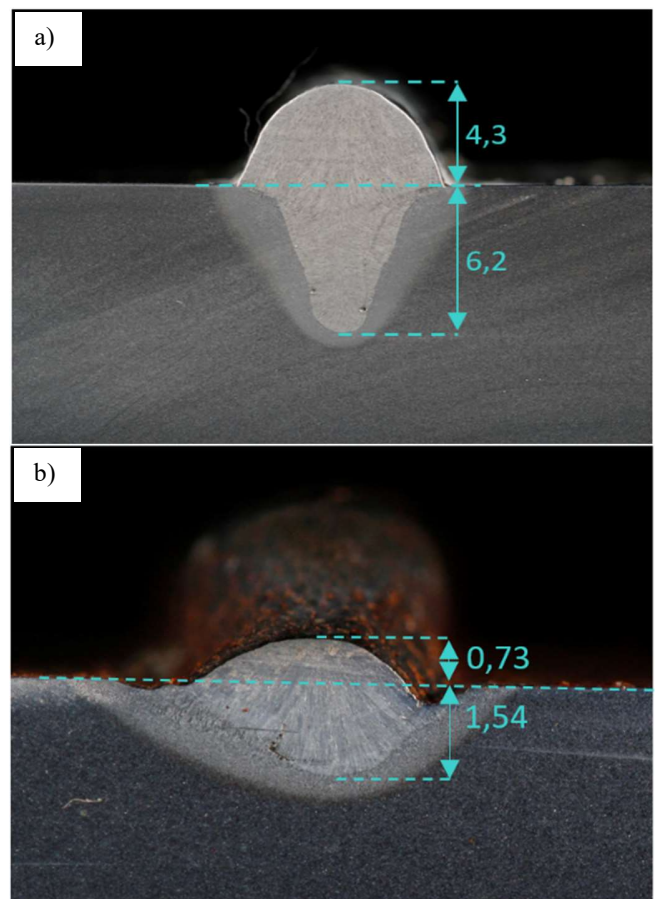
Macrographs, (a) Weld bead C1, $V_s = 0.6$ m/min; (b) Weld bead C20, $V_s = 2.5$ m/min.
